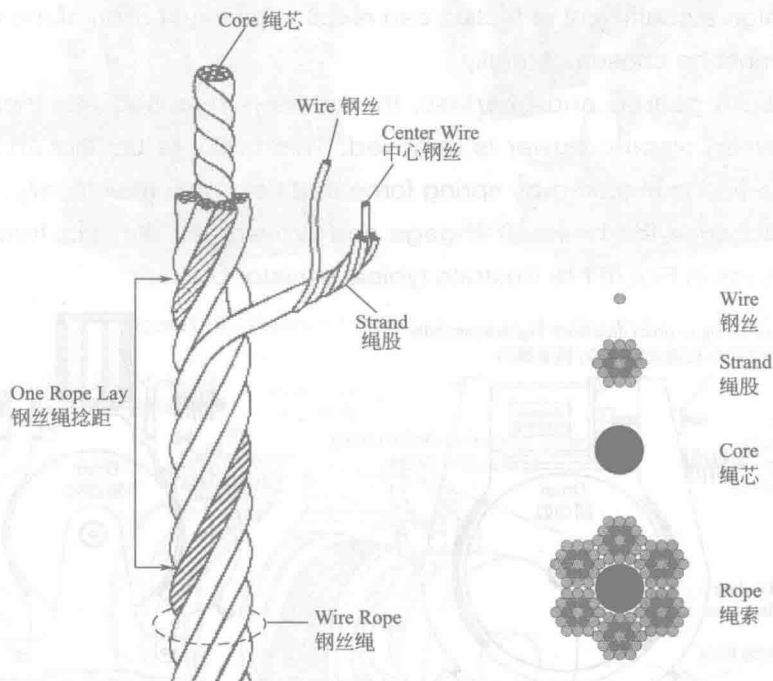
Wire Rope Structure and Section (钢丝绳结构及截面)
